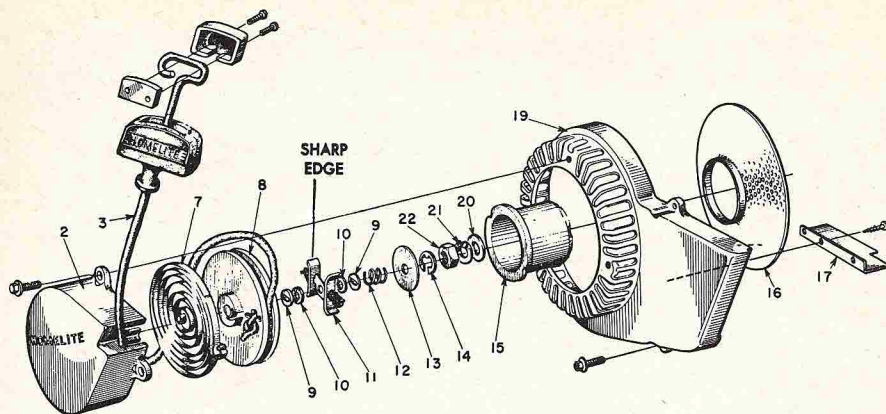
Exploded view of C Series Fairbanks-Morse starter. Friction shoe (11) components are not available separately; however, if unit has been disassembled, refer to Fig. HL64A for reassembly. Baffle (17) is integral with housing on late production units.
